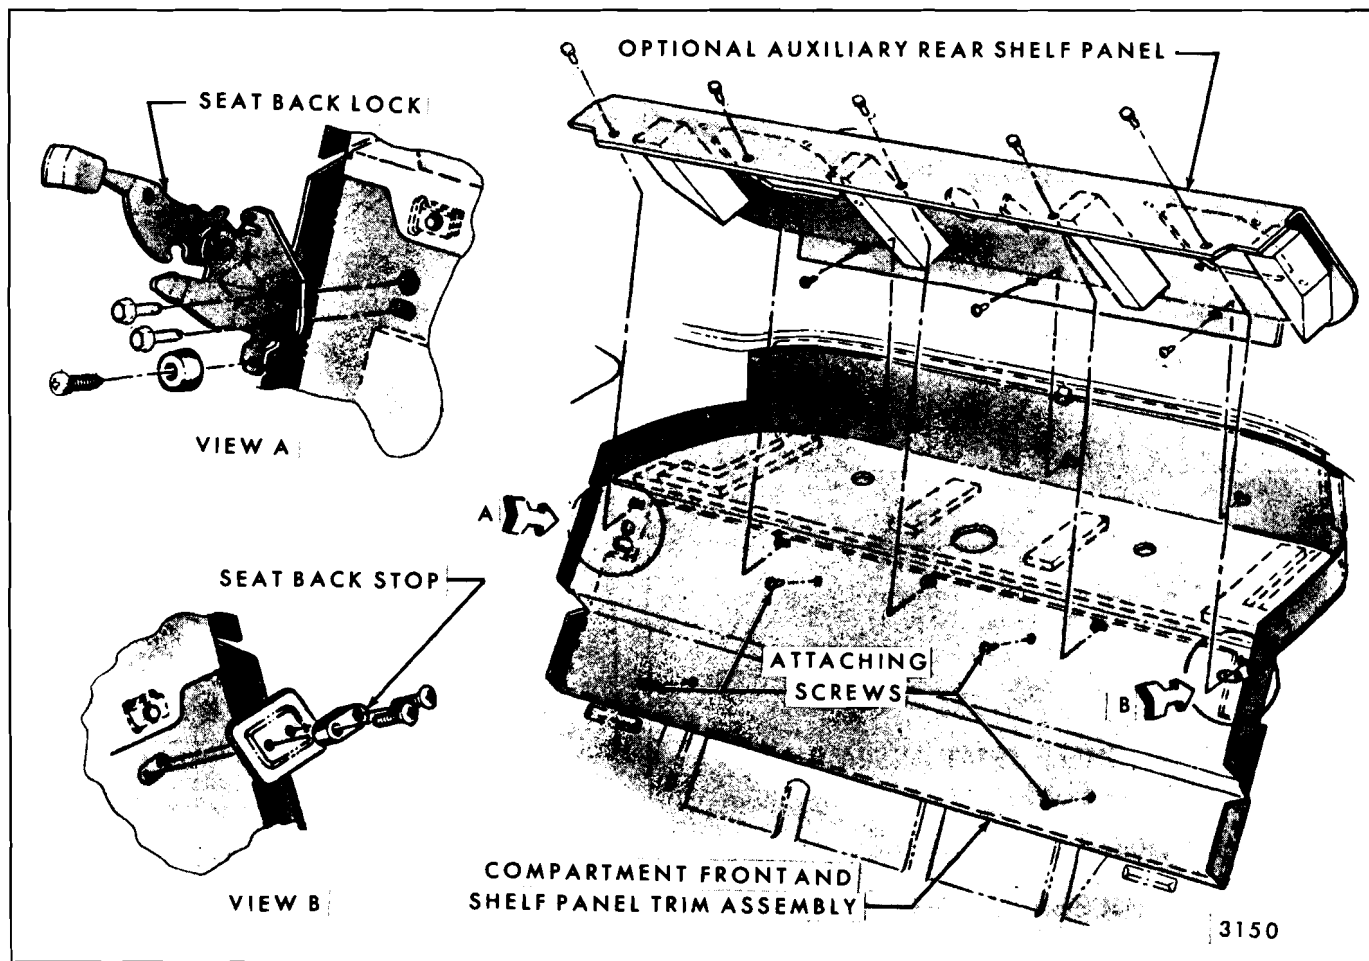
Compartment Shelf Trim and Auxiliary Shelf Trim Panel "Z" Styles
